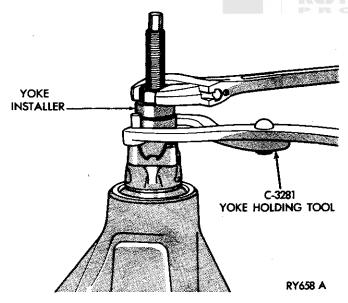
Drive Pinion Gear Shaft (Axle) Yoke Installation
